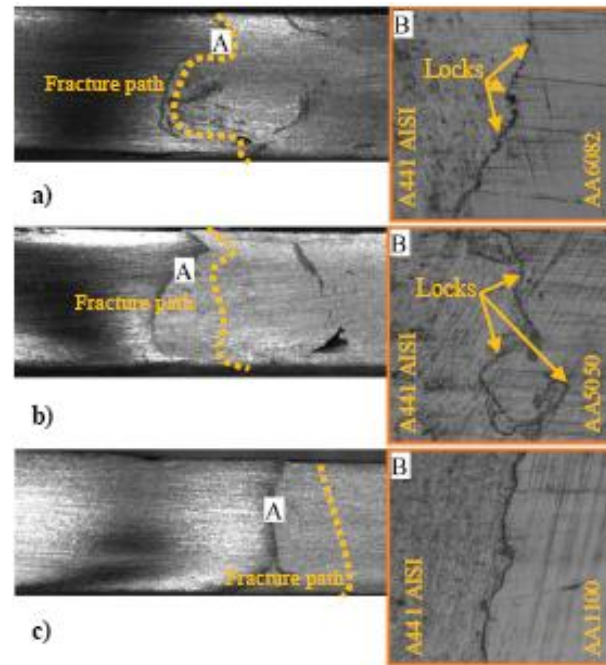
A441 AISI to aluminum alloys joints fracture path.
